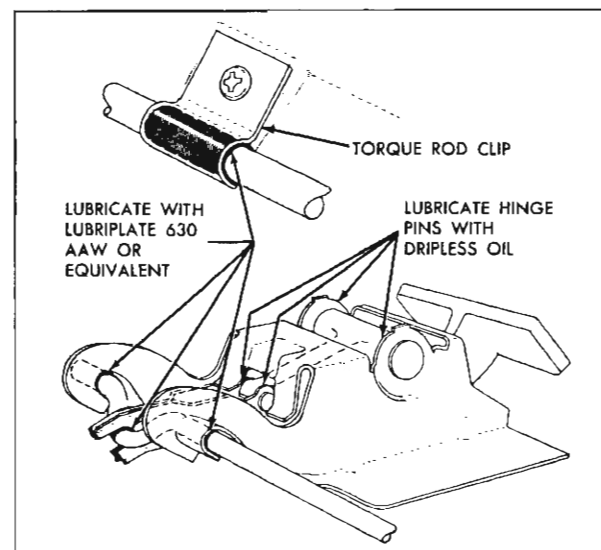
Back Door Hinge and Torque Rod Lubrication
